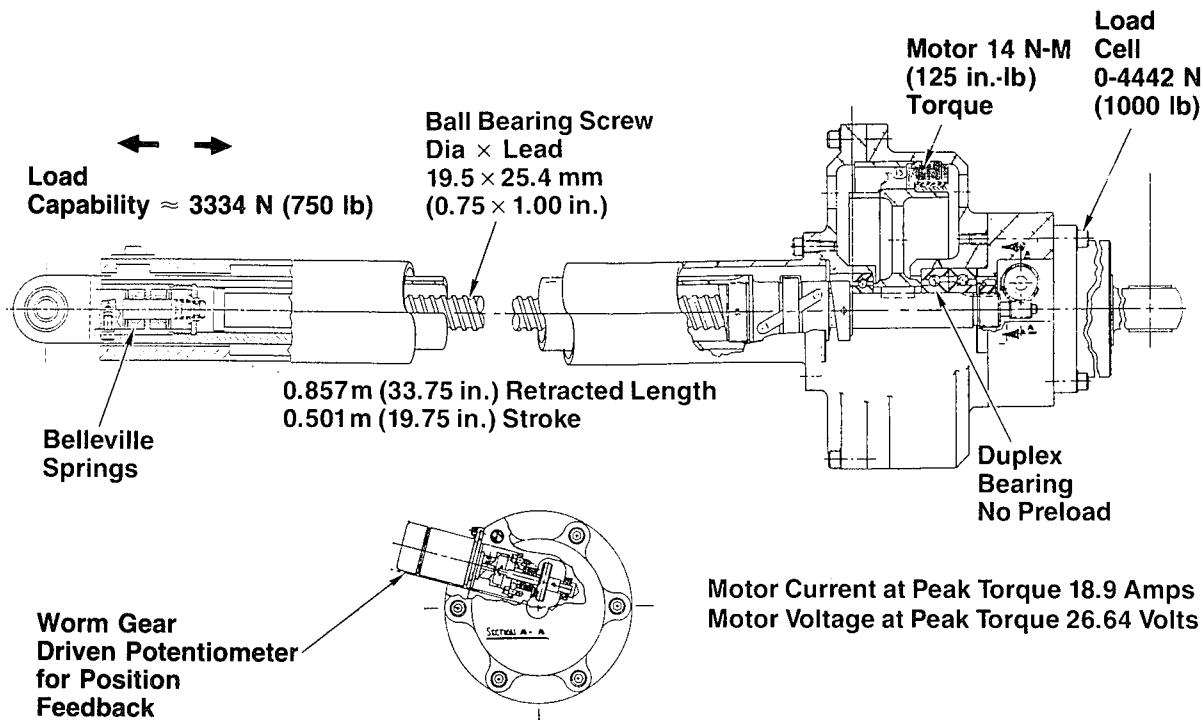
Berthing Mechanism Actuator/Attenuator Design
